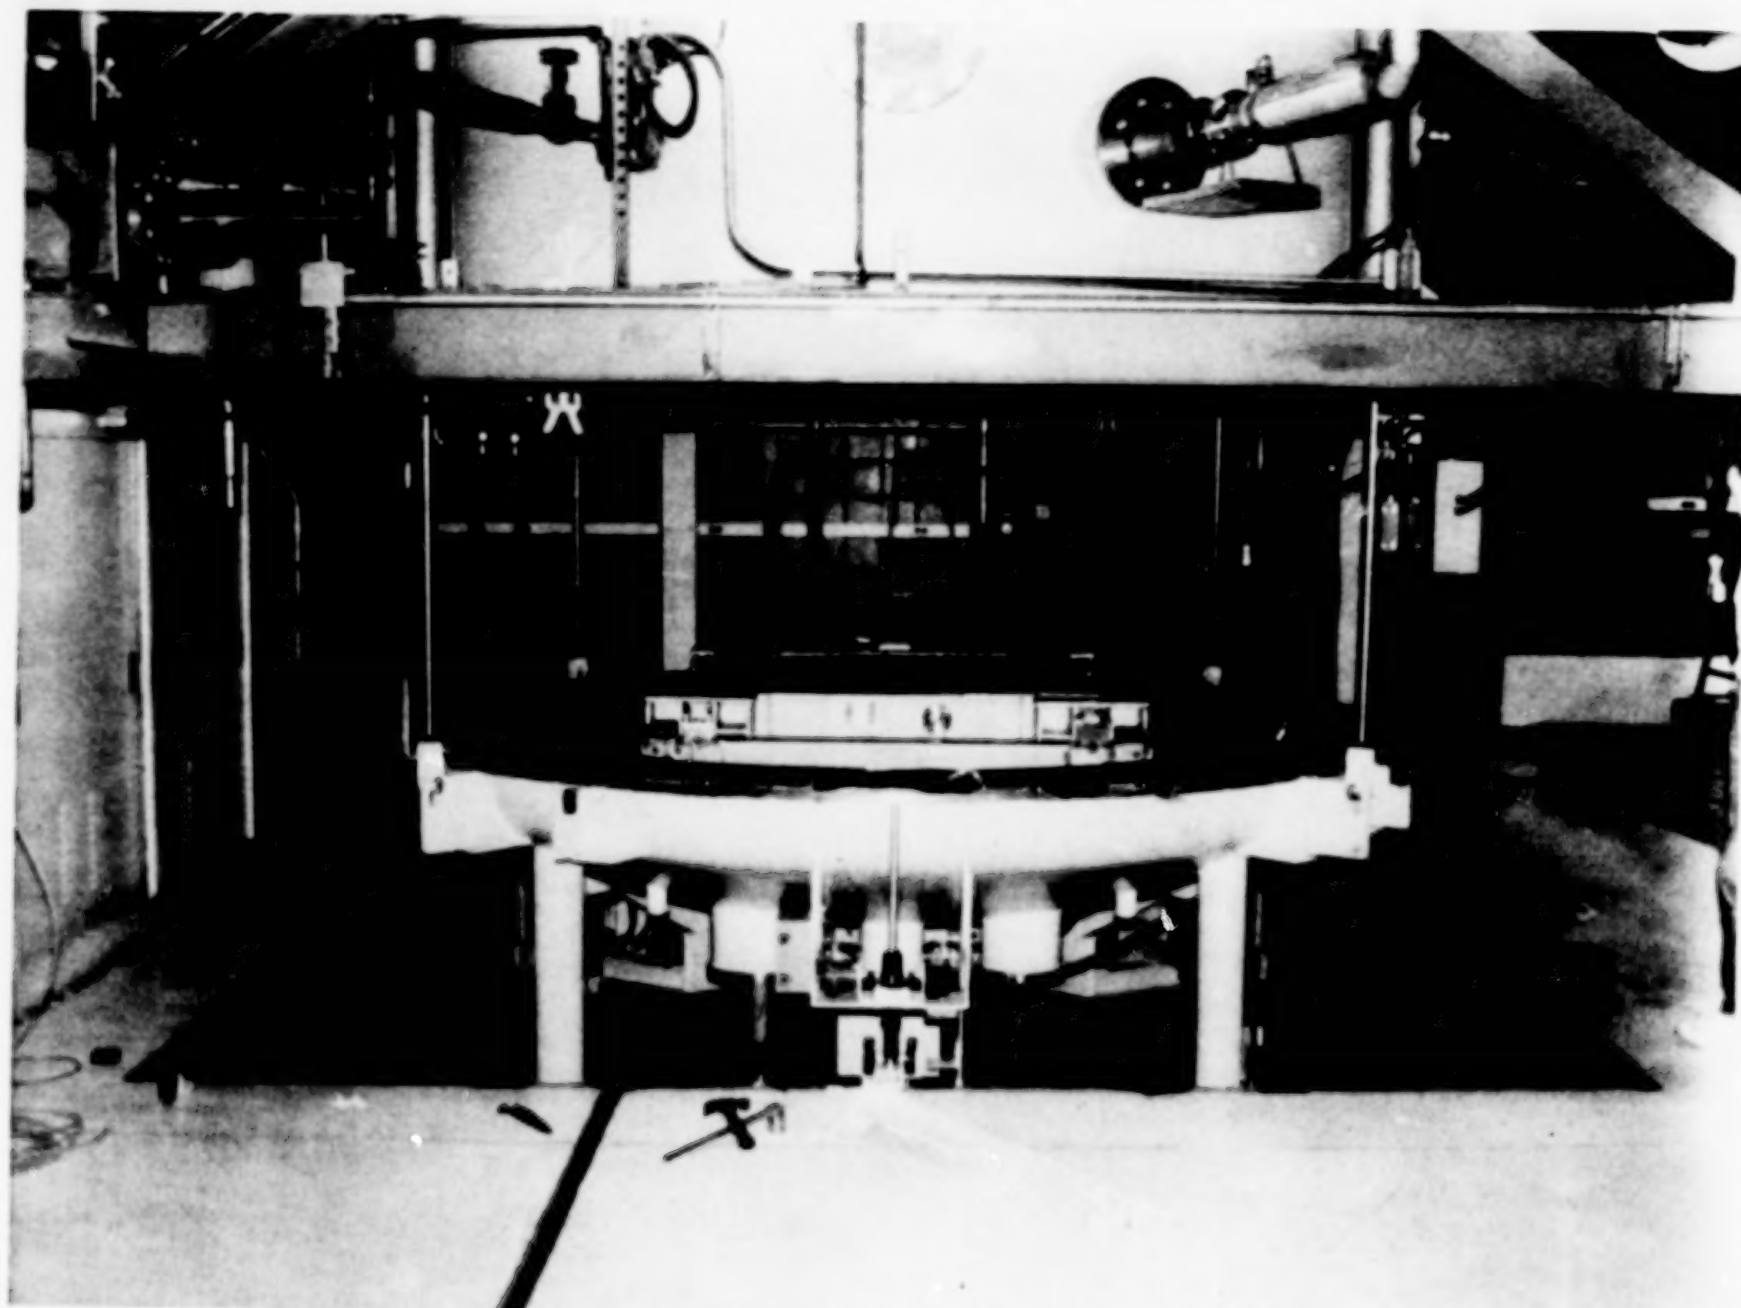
LOWERING BOTTOM HEAD INTO PIT
